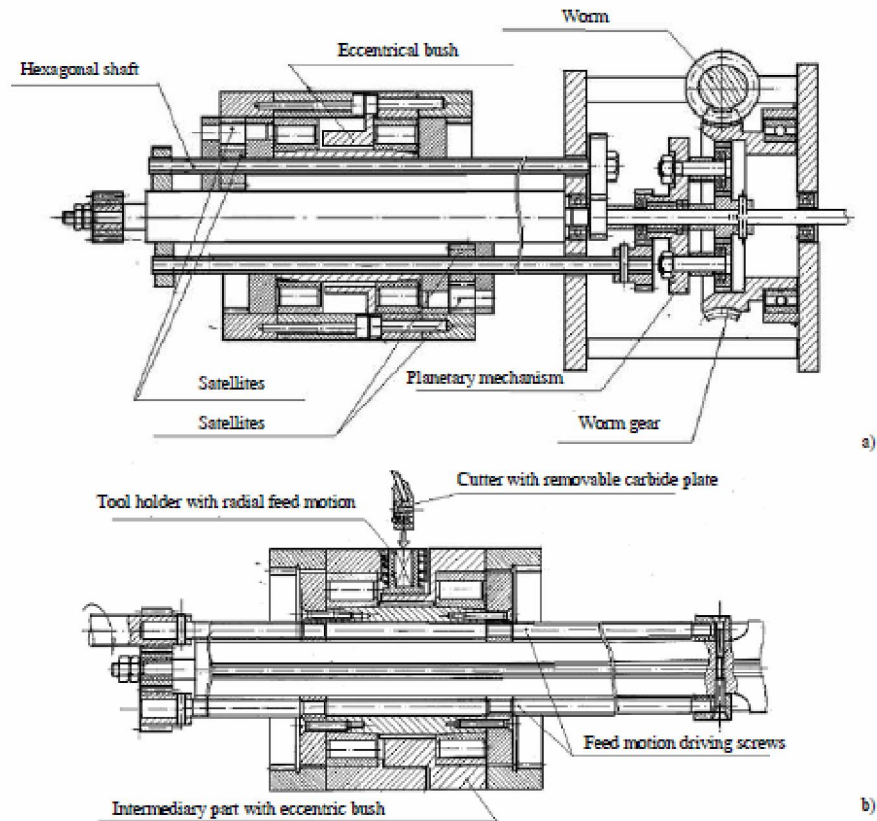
Device for boring dimensional adaptive control: a – the rotation motion and the tool radial position adjustment; b – the axial feed.
